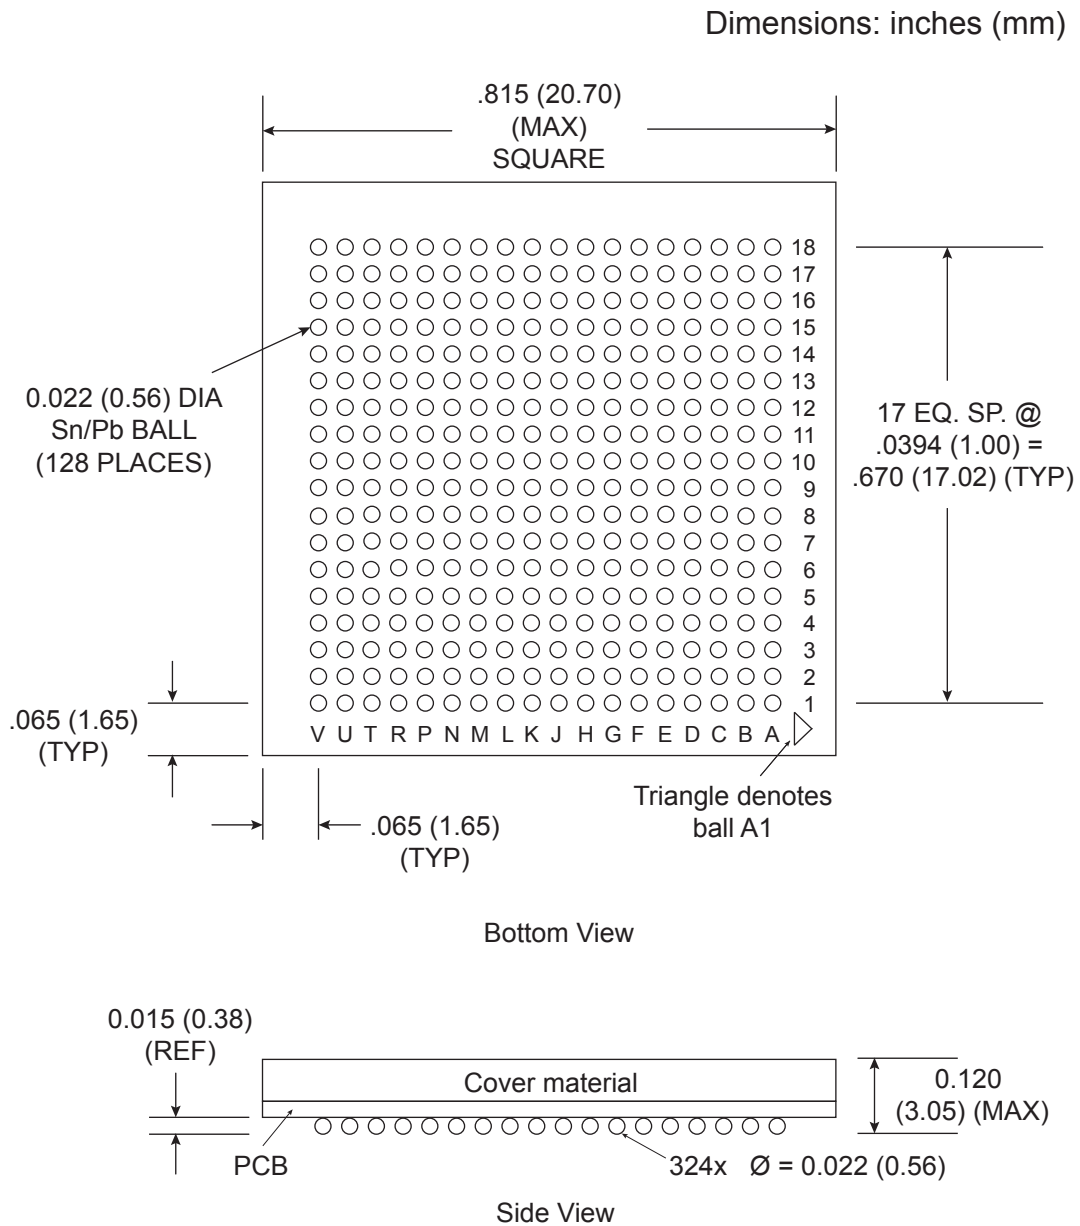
Ball Grid Array Package Dimensions (BGA-324)
